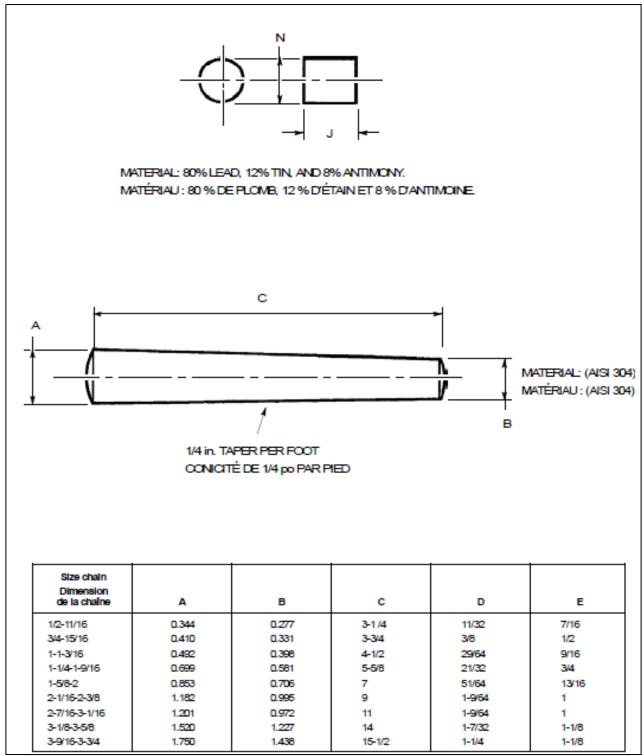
Dimensions of Tapered Pins and Lead Pellets for Baldt Detachable Anchor Connection Link (Ref. A) (Dimensions shown are in inches)
